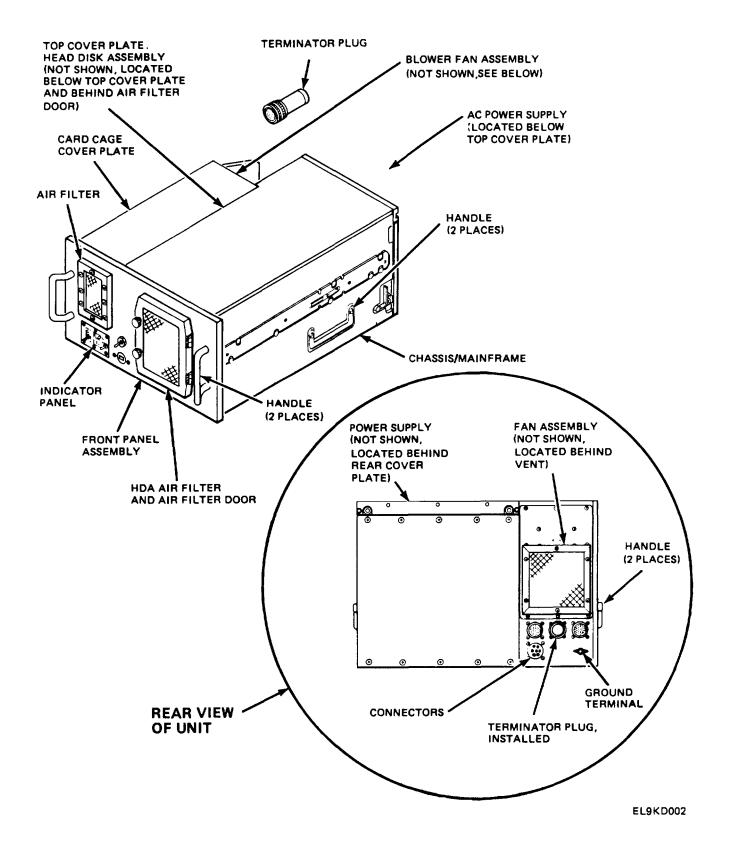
Disk Unite, Component Locations, Front Oblique View and Rear View
